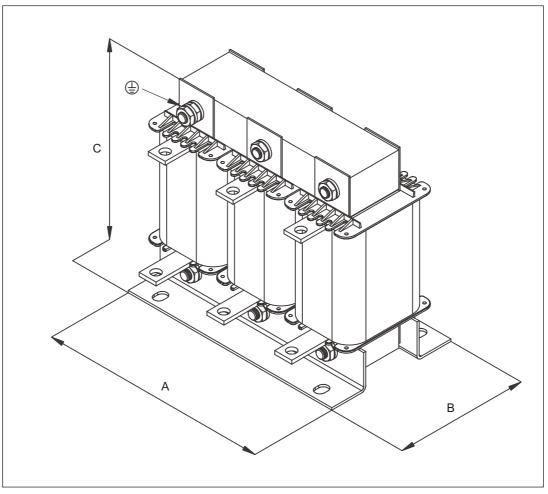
Dimension drawing of line reactor, frame size FSF
